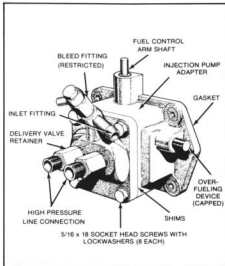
BRYCE/KIKI PUMP AND ADAPTER ASSEMBLY
